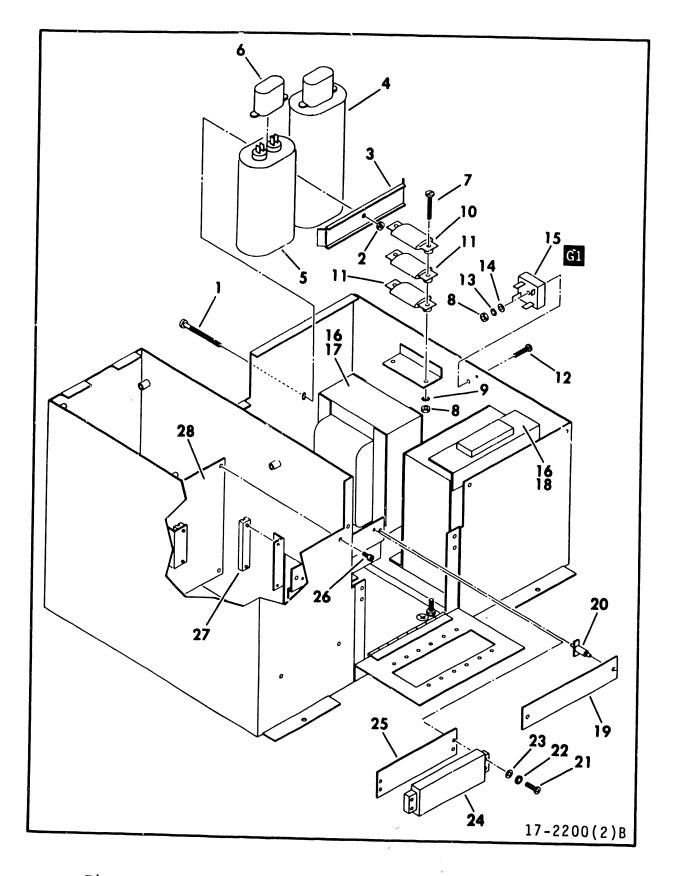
A-22. DC Power Supply Assembly (Sheet 2)
